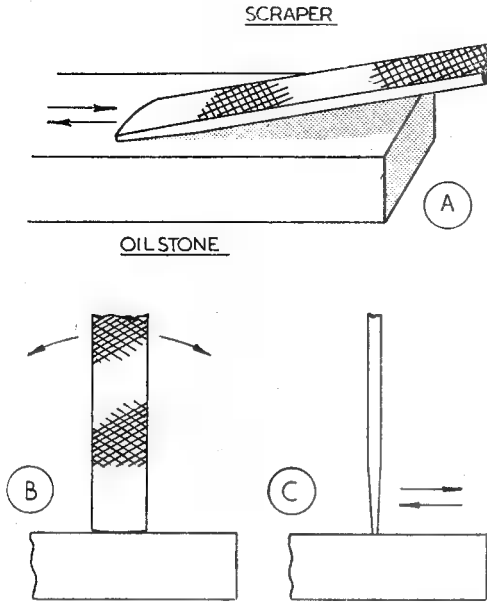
Oilstoning the scraper : "A"—honing the side faces ; "B" and "C"—two methods of stoning the end face
